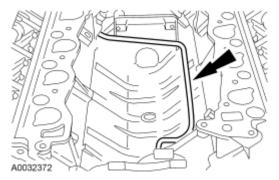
Coolant Bypass Tube Courtesy of FORD MOTOR CO.
